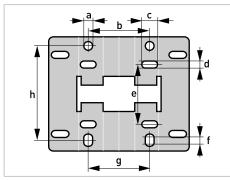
Dimensions of mounting plate of wall-mounted housing
